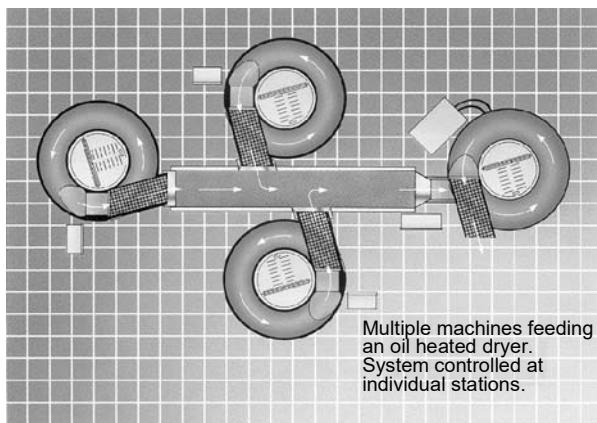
Multiple bowl machines feed an oil heated bowl dryer (courtesy: Hammond Roto-Finish)
